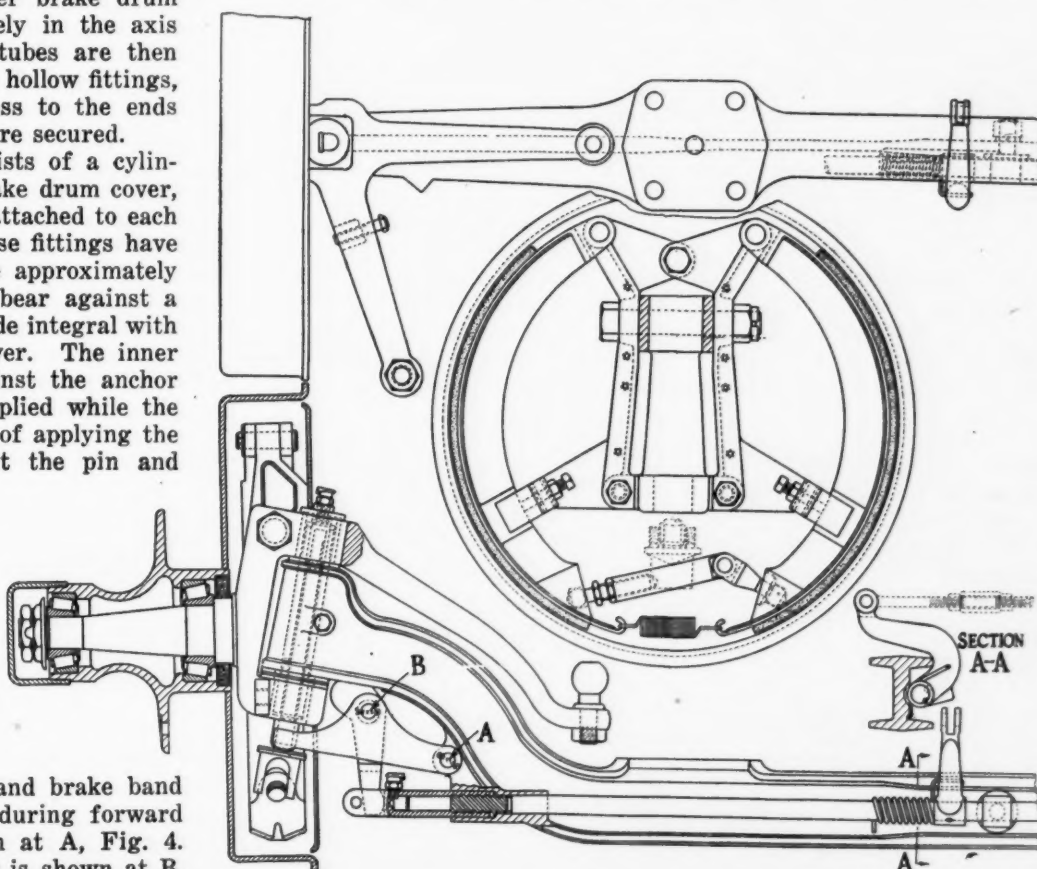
Toggle operated front wheel brake put out by U. S. Axle Co.
